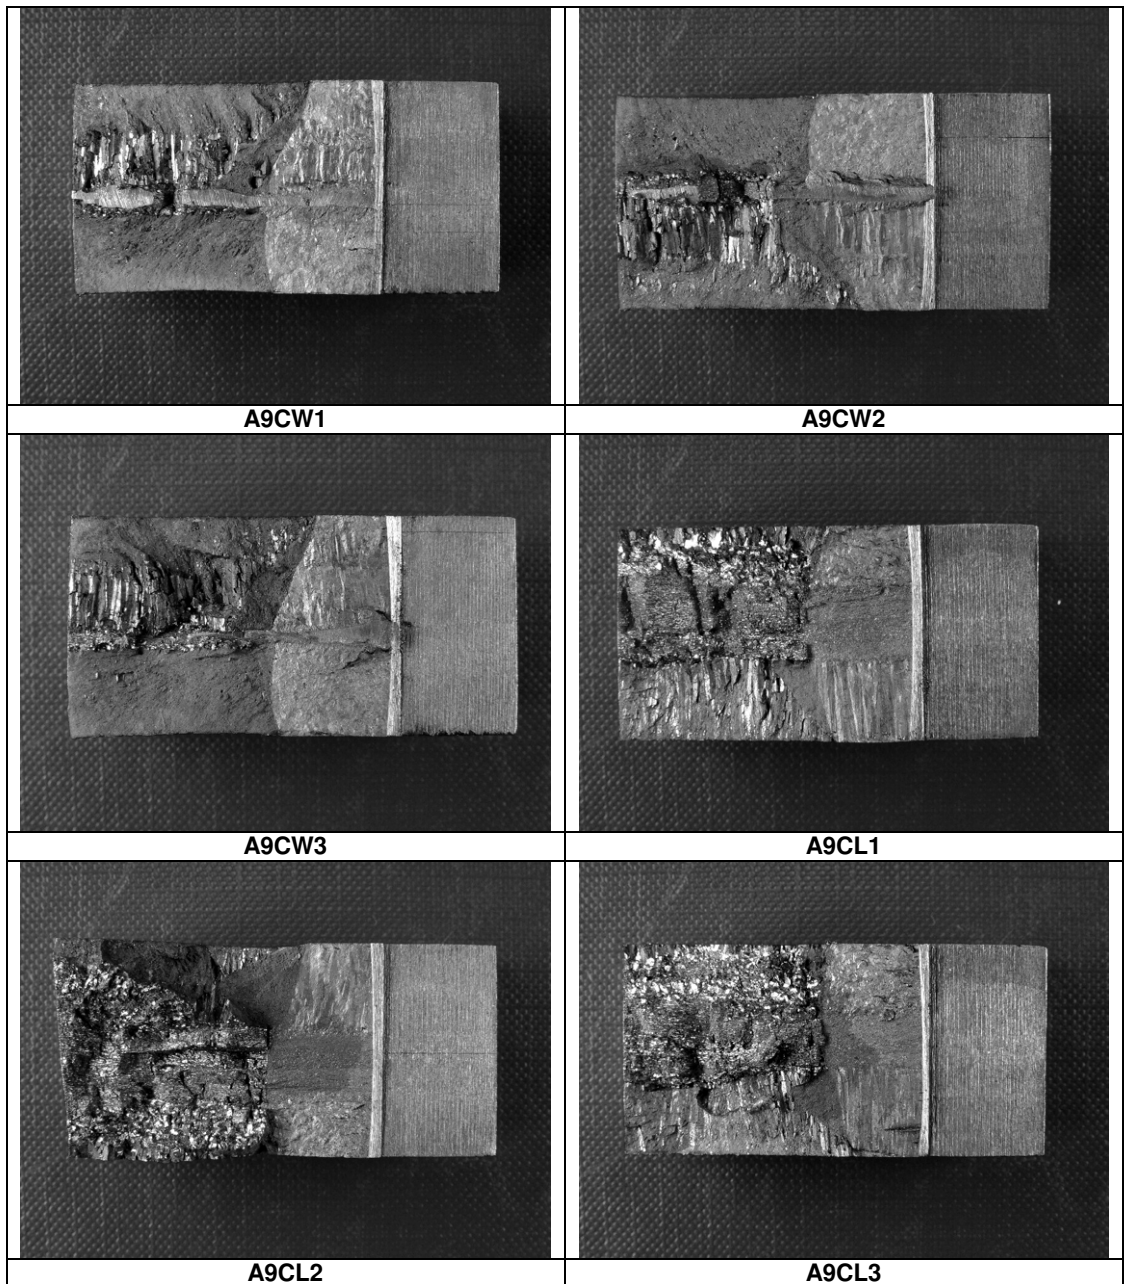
Fractographs of CTOD samples from 20 mm thick SAW weld (A9).
